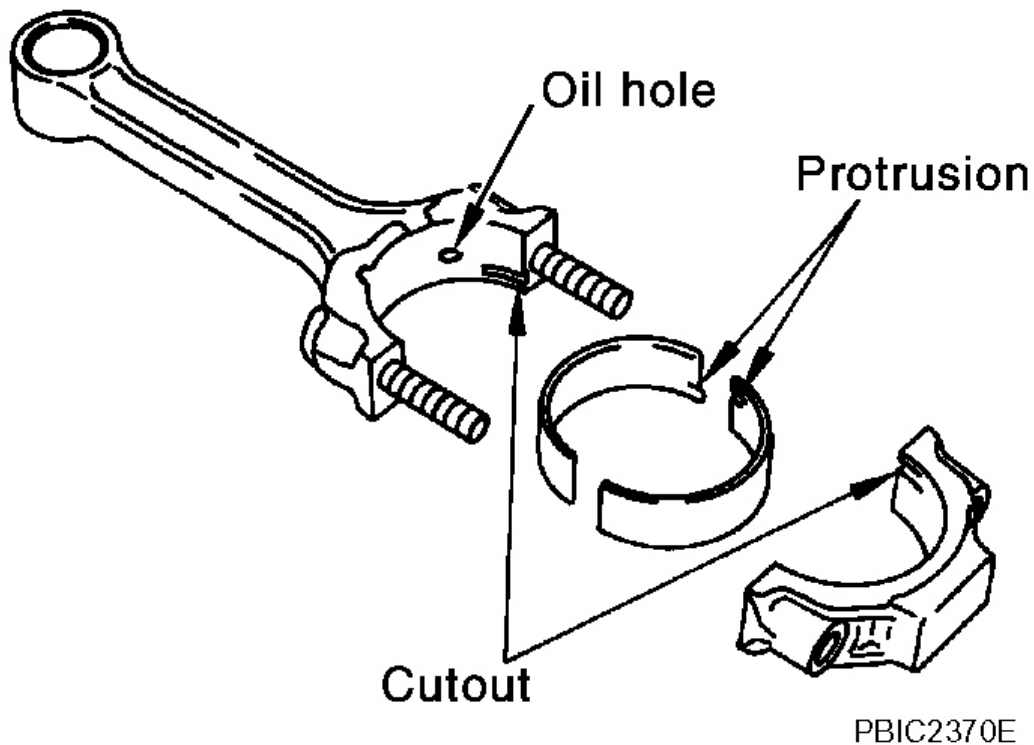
Aligning Connecting Rod Bearing Stopper Protrusion With Cutout Of Connecting Rod And Connecting Rod Bearing Cap
